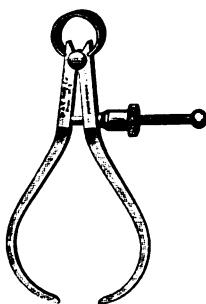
SPRING NUT OUTSIDE CALIPERS. FIG. 2.—SPRING NUT
